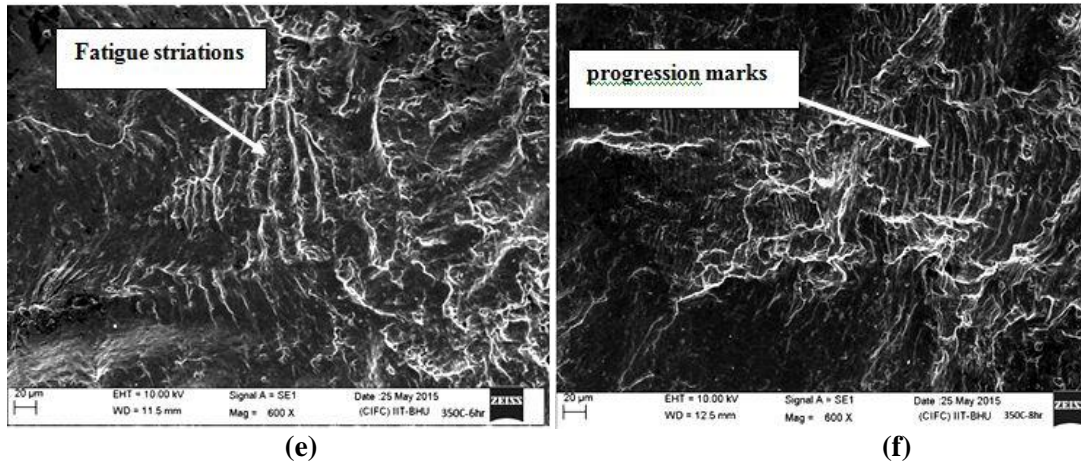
SEM Fractograph (Segment) fracture surface of the Fatigue tested AA 6063 at different heat treatment conditions:
